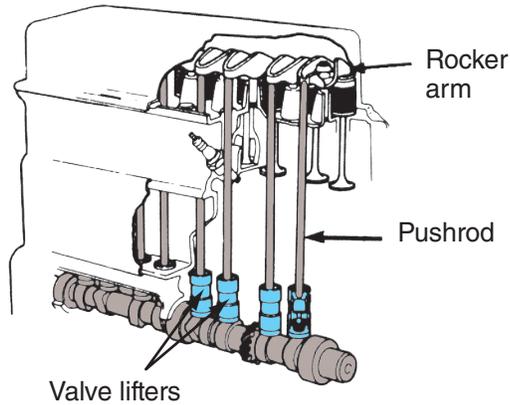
Some overhead valve (I-head) engines use pushrods to operate rocker arms.
